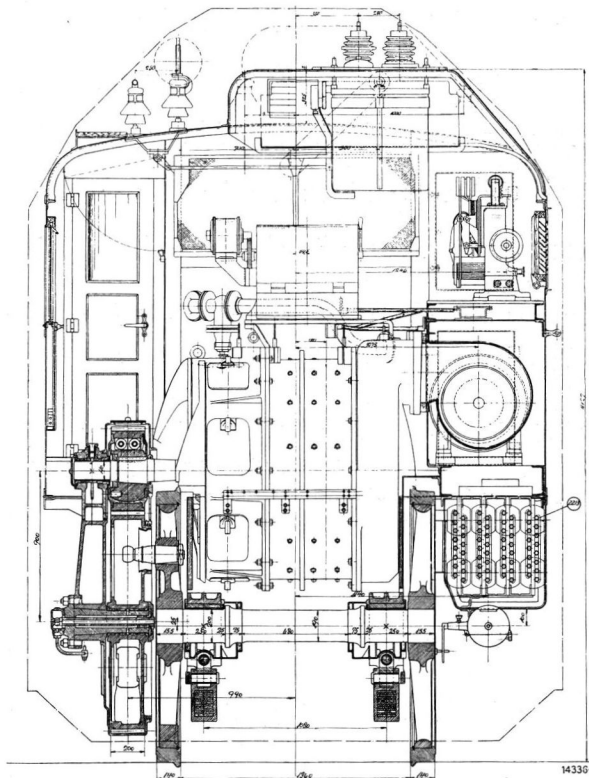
Arrangement of motors and gearing with Brown Boveri individual axle drive.
